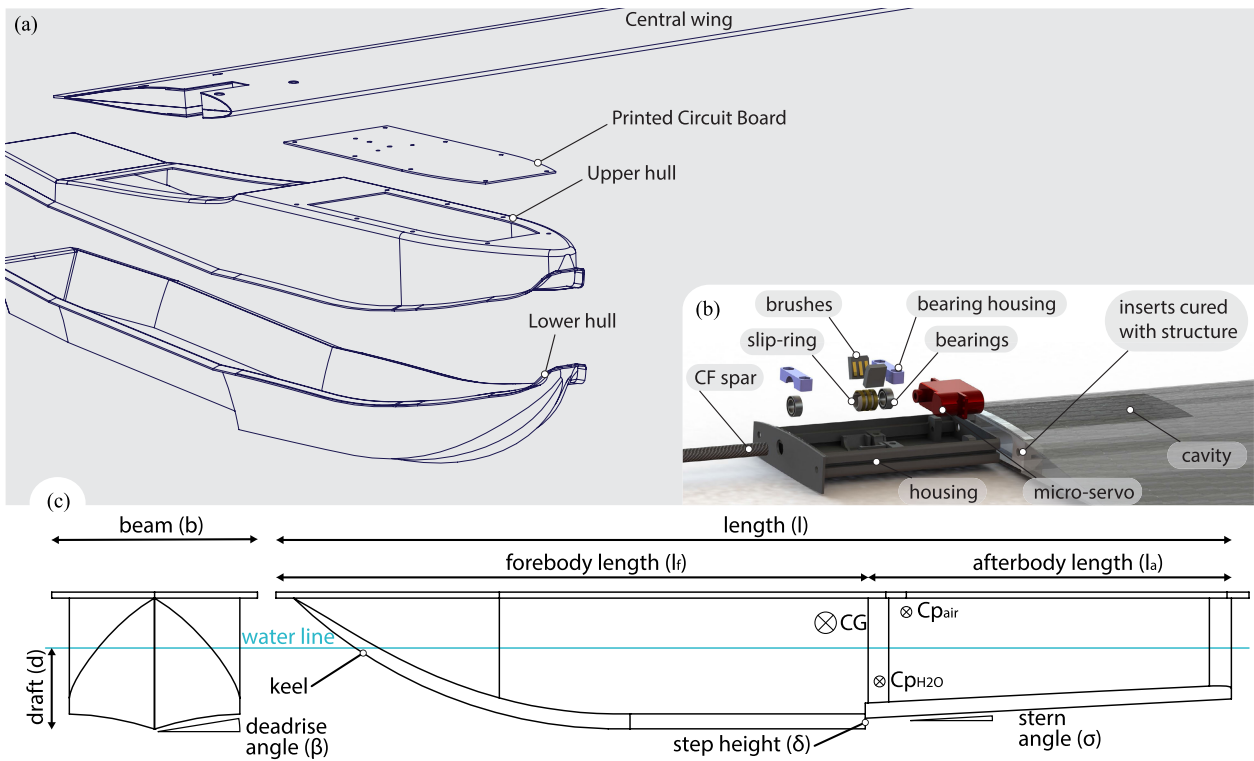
(a) Exploded structure view. (b) Sails embedded actuation design. (c) Schematic of hull design parameters.
